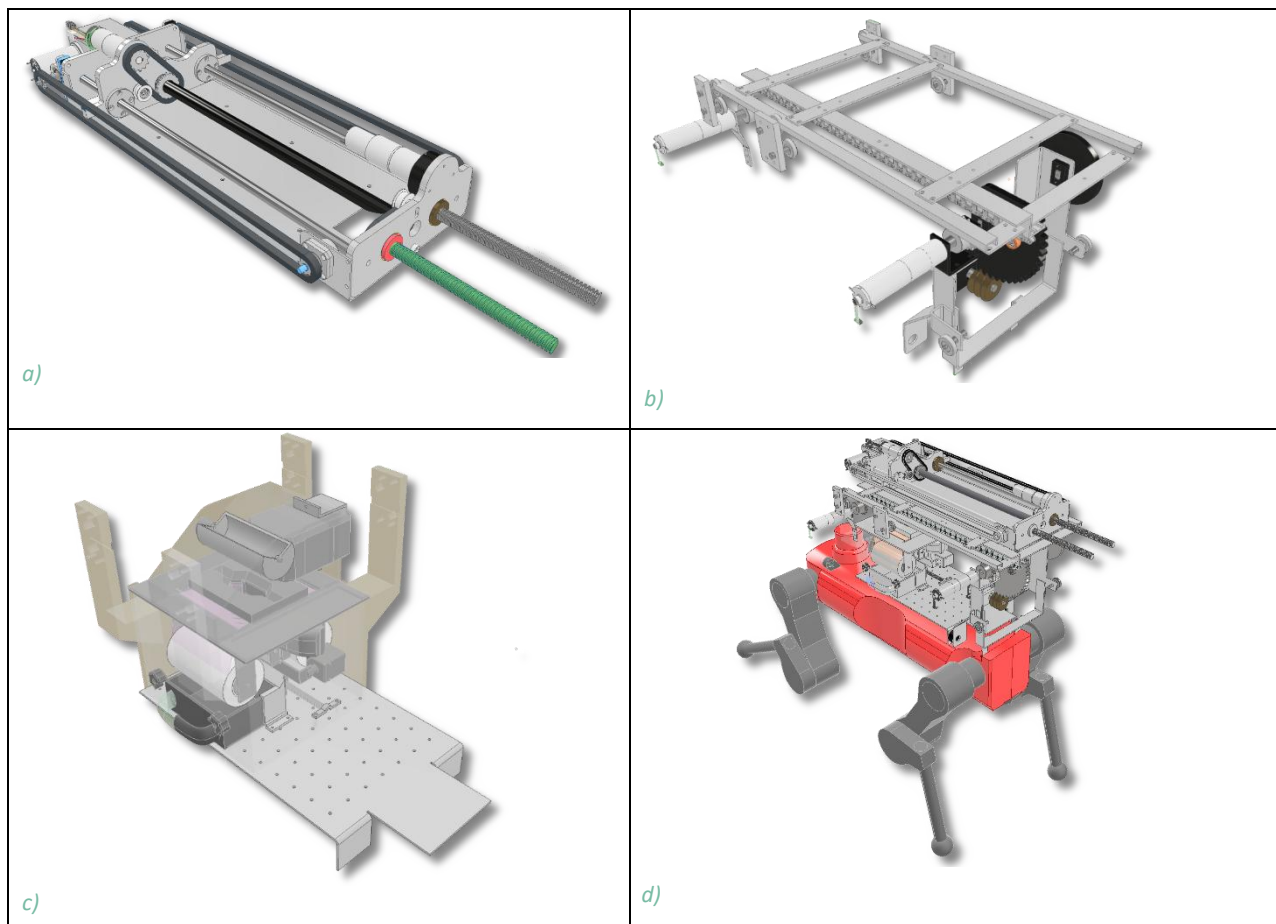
a) The first version of drilling device b) Tilt Mechanism c) Packaging unit d) full ANYmal payload
